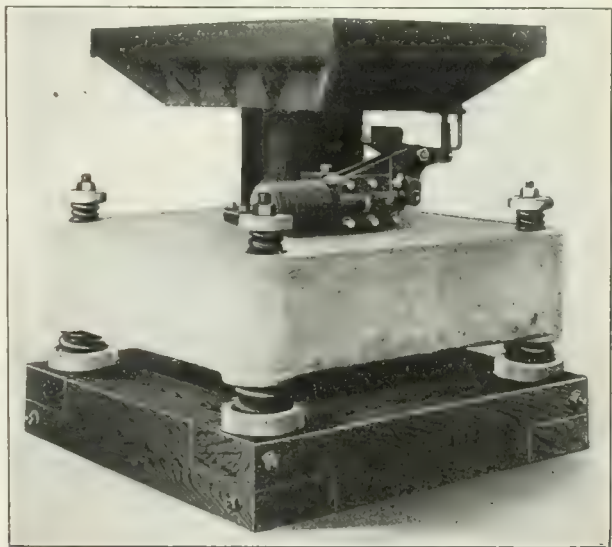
The Osborn No Shock Jolt Molding Machine
